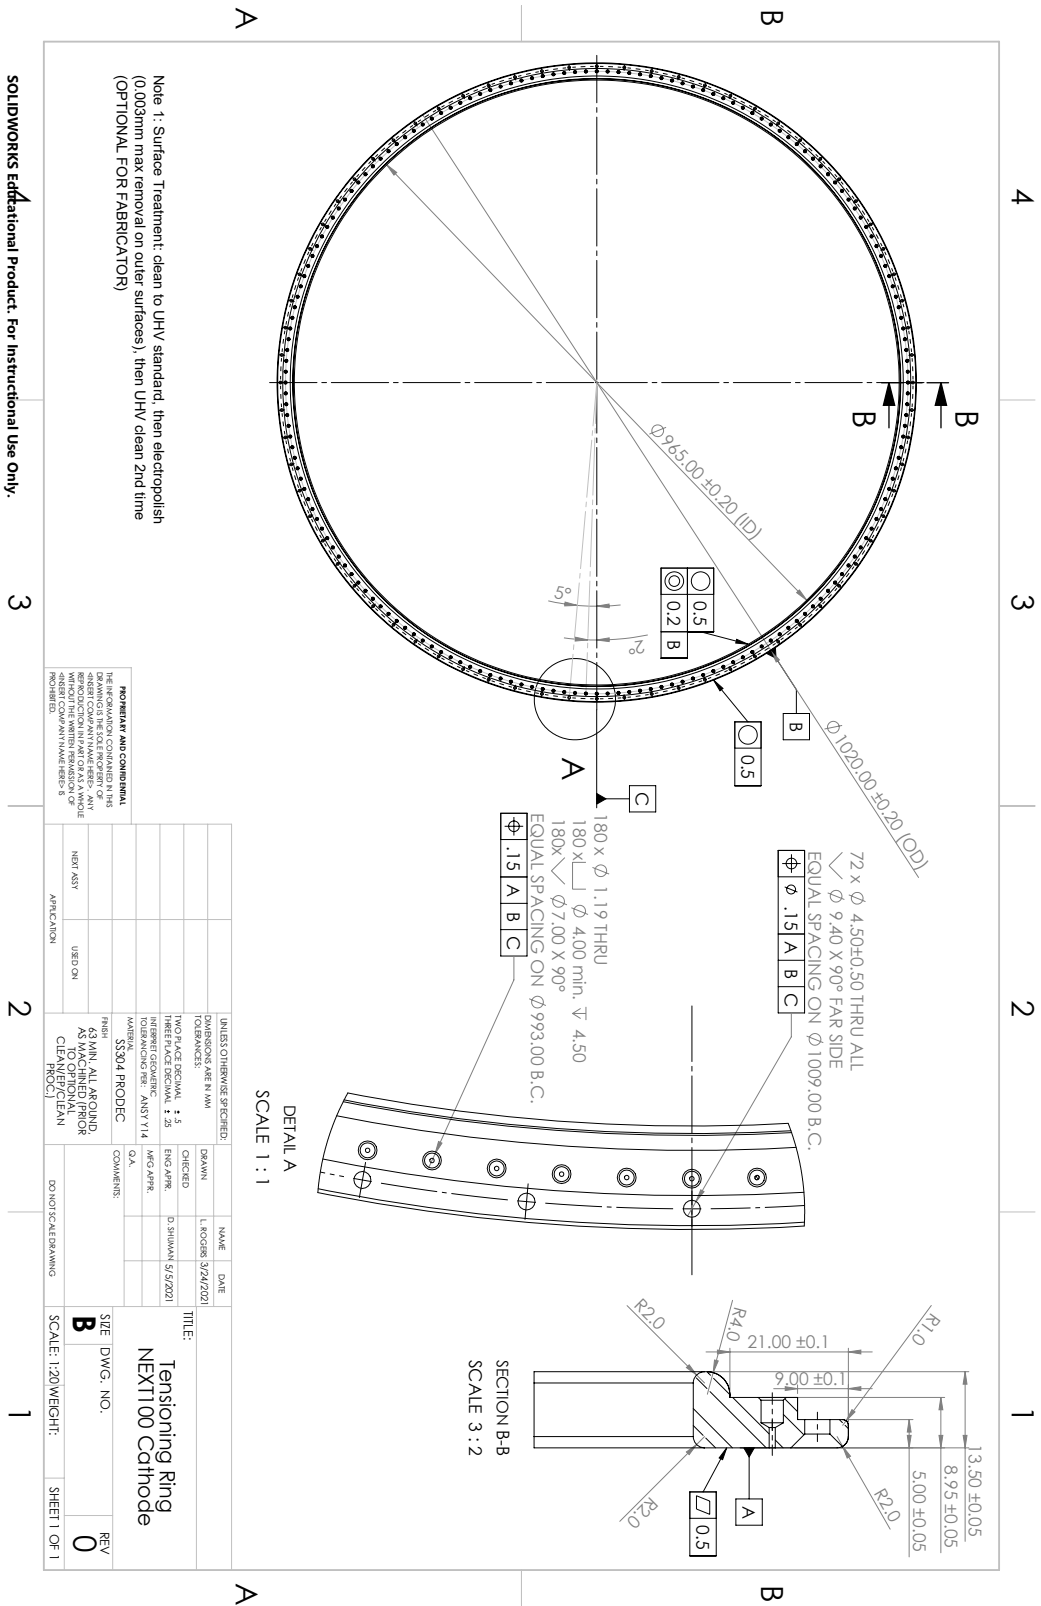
Machine drawings for manufacturing the Cathode Tension ring.
